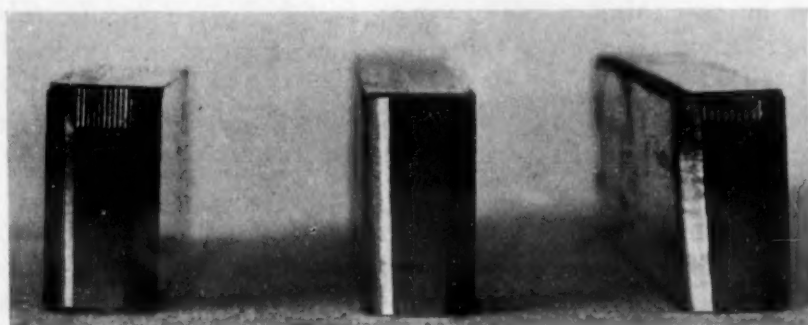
New High Speed Steel Lathe Tool and Tools Which Failed under Shallow Cuts and Fine Feeds. Note the Feed Grooves Worn on the Front of Tools during Test
